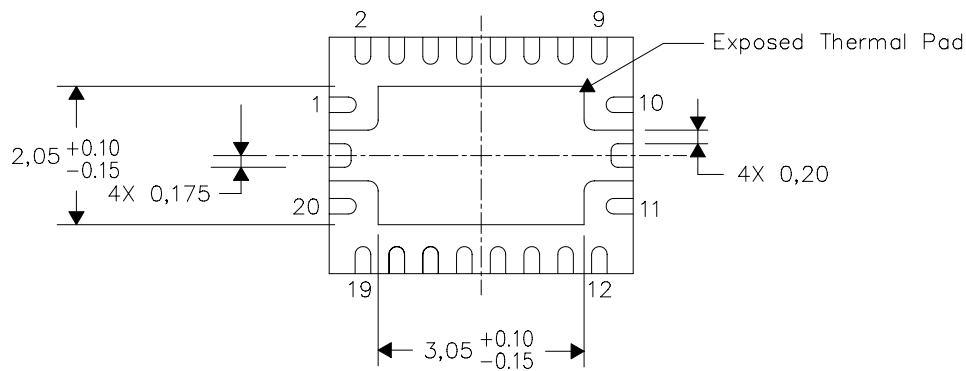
Recommended PCB Layout, Bottom Side, Top View
